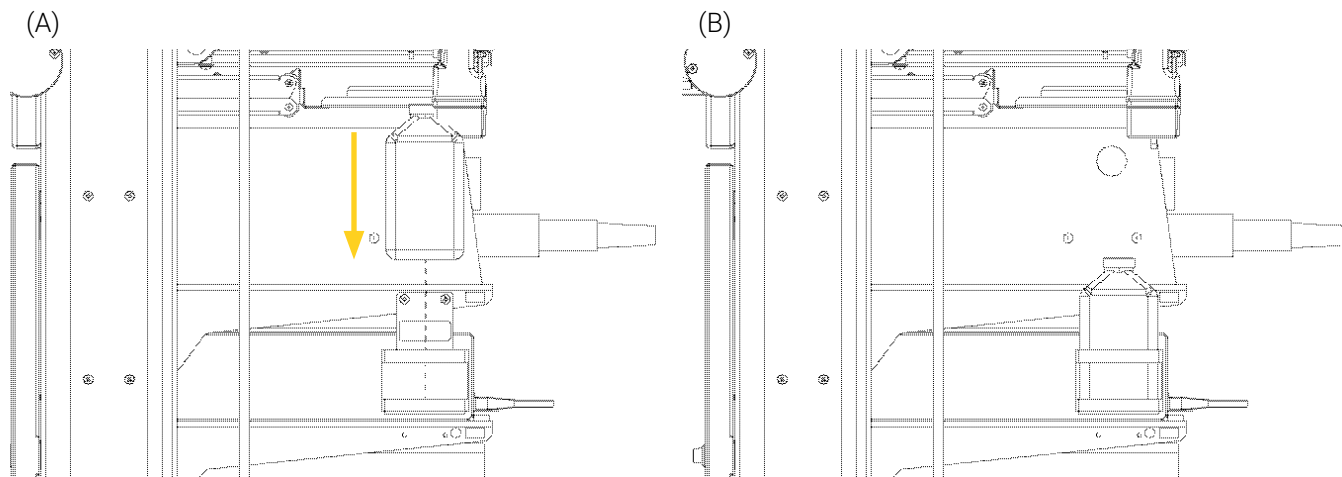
Removal of the gas cylinder from the mounting bracket
